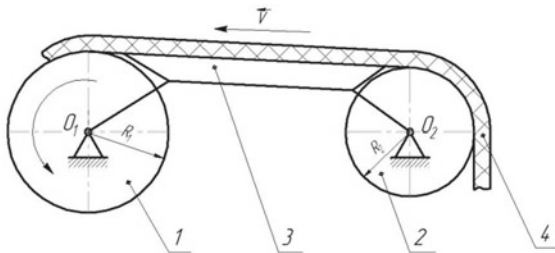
Scheme of the conveying mechanism. 1—drive shaft; 2—driven shaft; 3—spreading table; 4—semi-finished leather product
